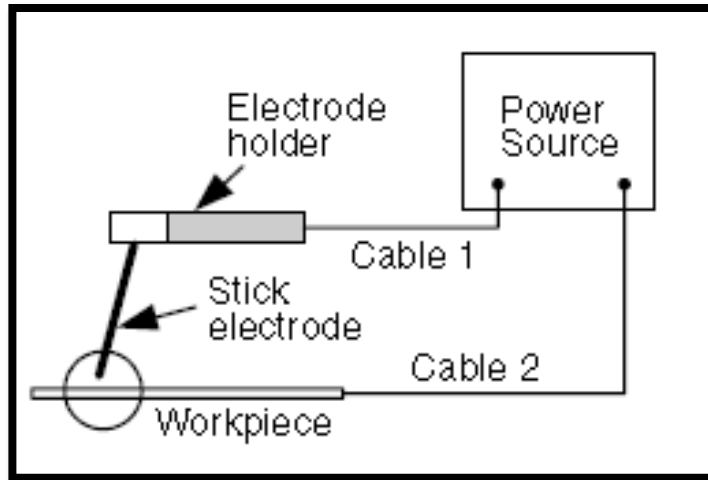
Scheme of Shielded Metal Arc Welding circuit [10]
